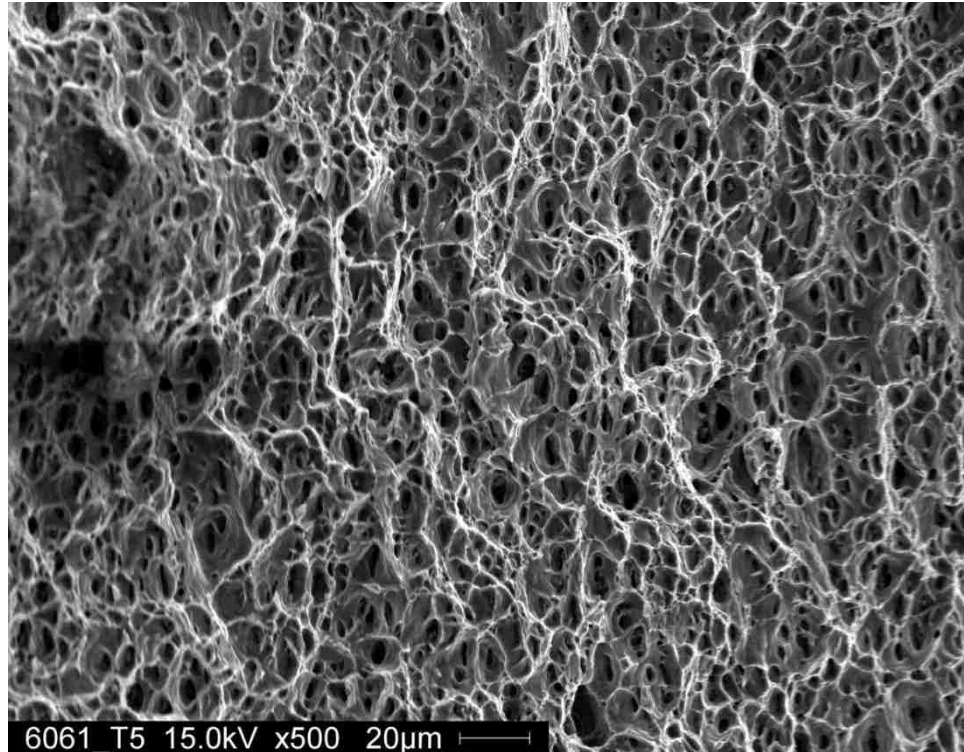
Fractograph of the tensile specimen of T5 welded cast alloy A356.
